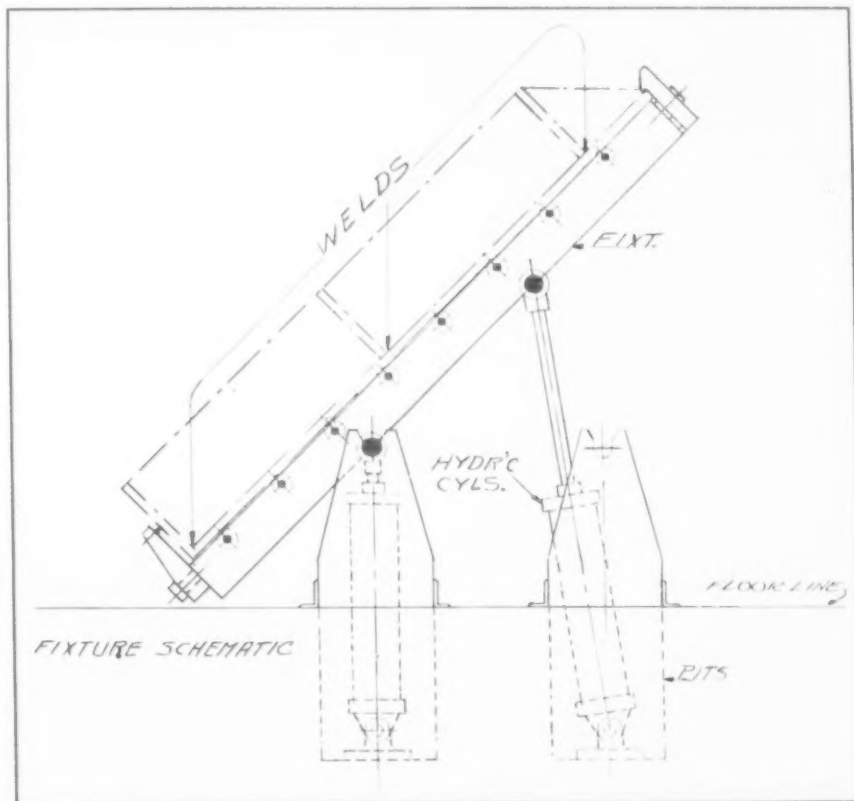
Simple positioner used in welding bottom fillets in Figure 9.
